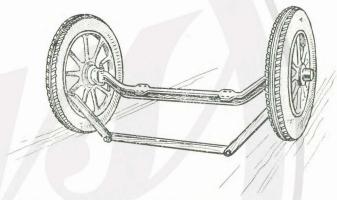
Suggested Gauge for Testing Front Wheel Alignment.
